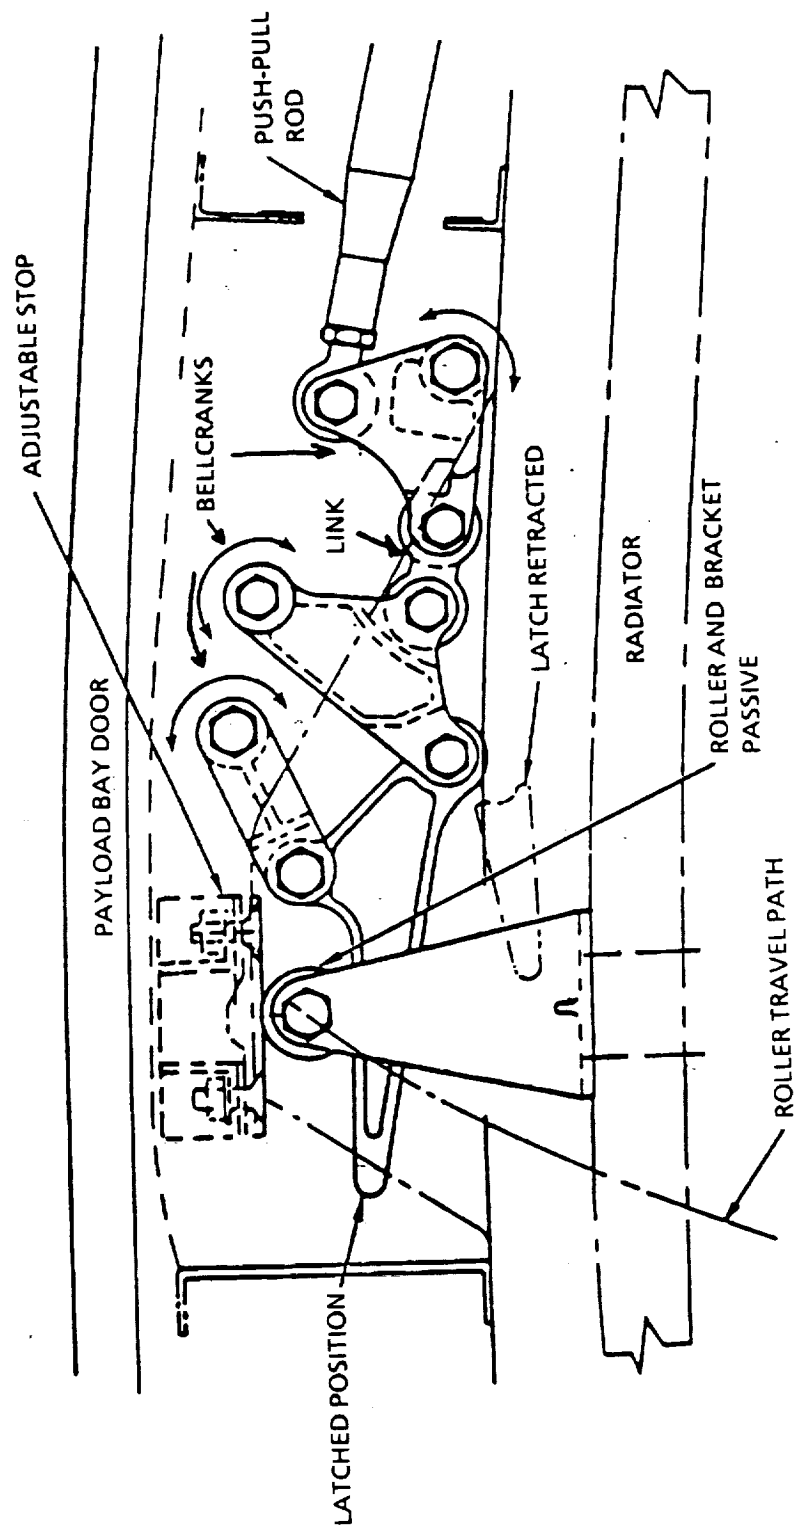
RADIATOR LATCH HOOK MECHANISM
